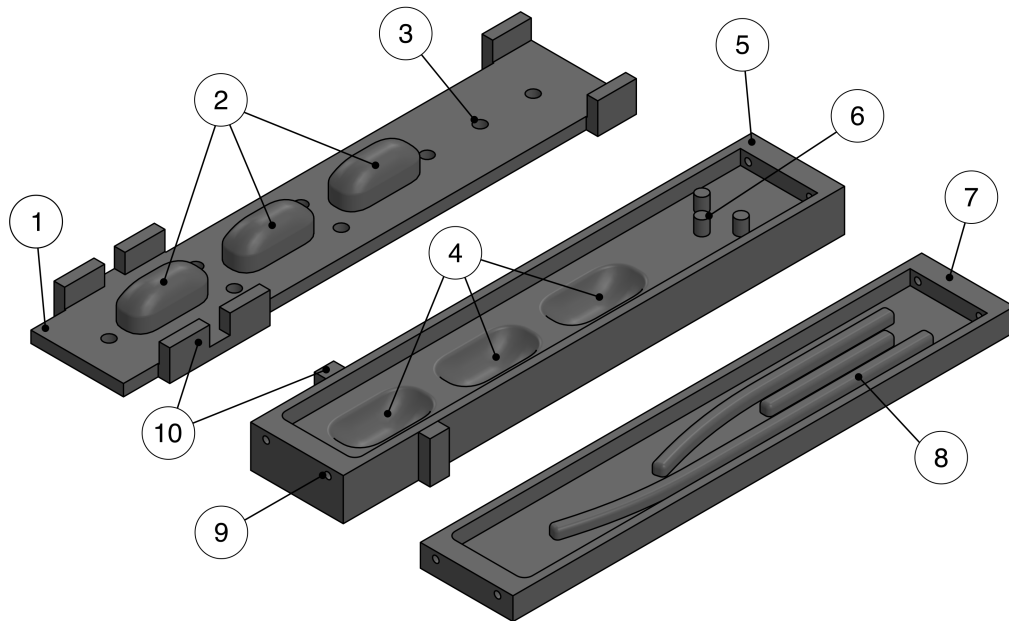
Multi-bladder variant finger molds. 1: Punch plate. 2: Punch volumes. 3: spillage holes. 4: Bladders recesses. 5: Front half mold. 6: Cylindrical pillars for pressure sensors. 7: Back half mold. 8: Ribs for sensing channels. 9: Guide through holes for tendon sheaths. 10: Alignment features.
